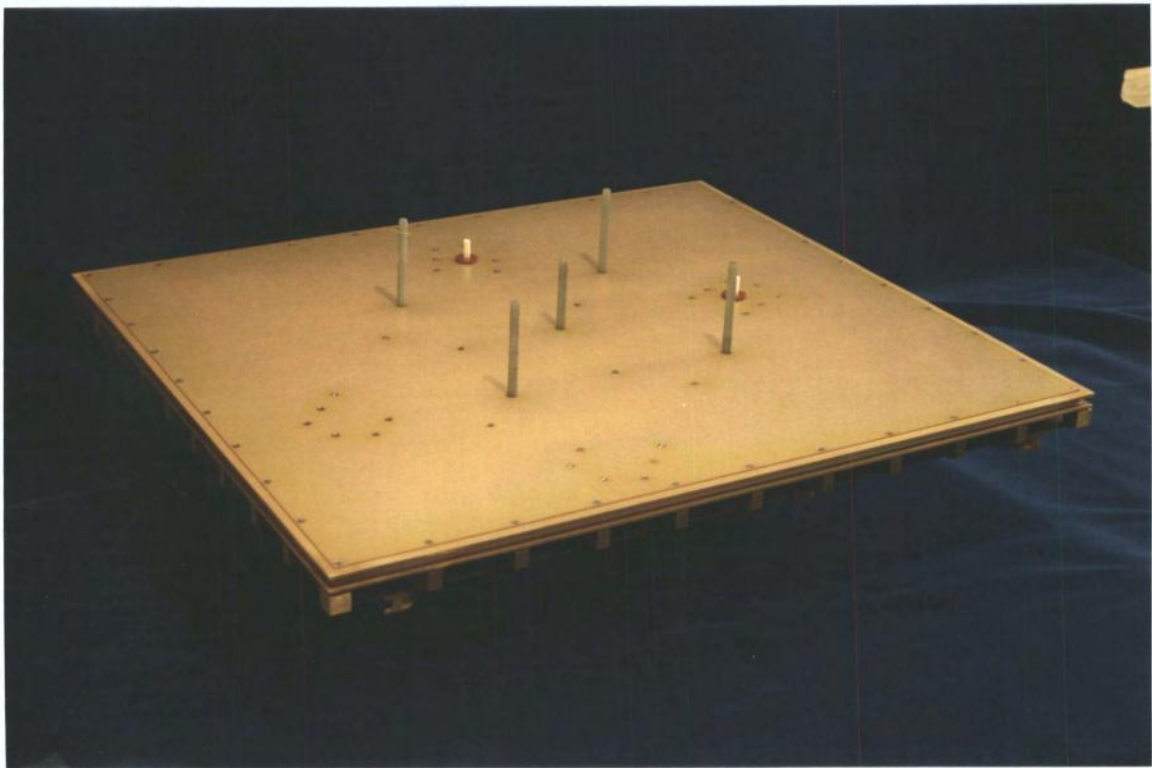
PHOTOGRAPH OF ENGINEERING MODEL BEFORE PATCH ASSEMBLY
